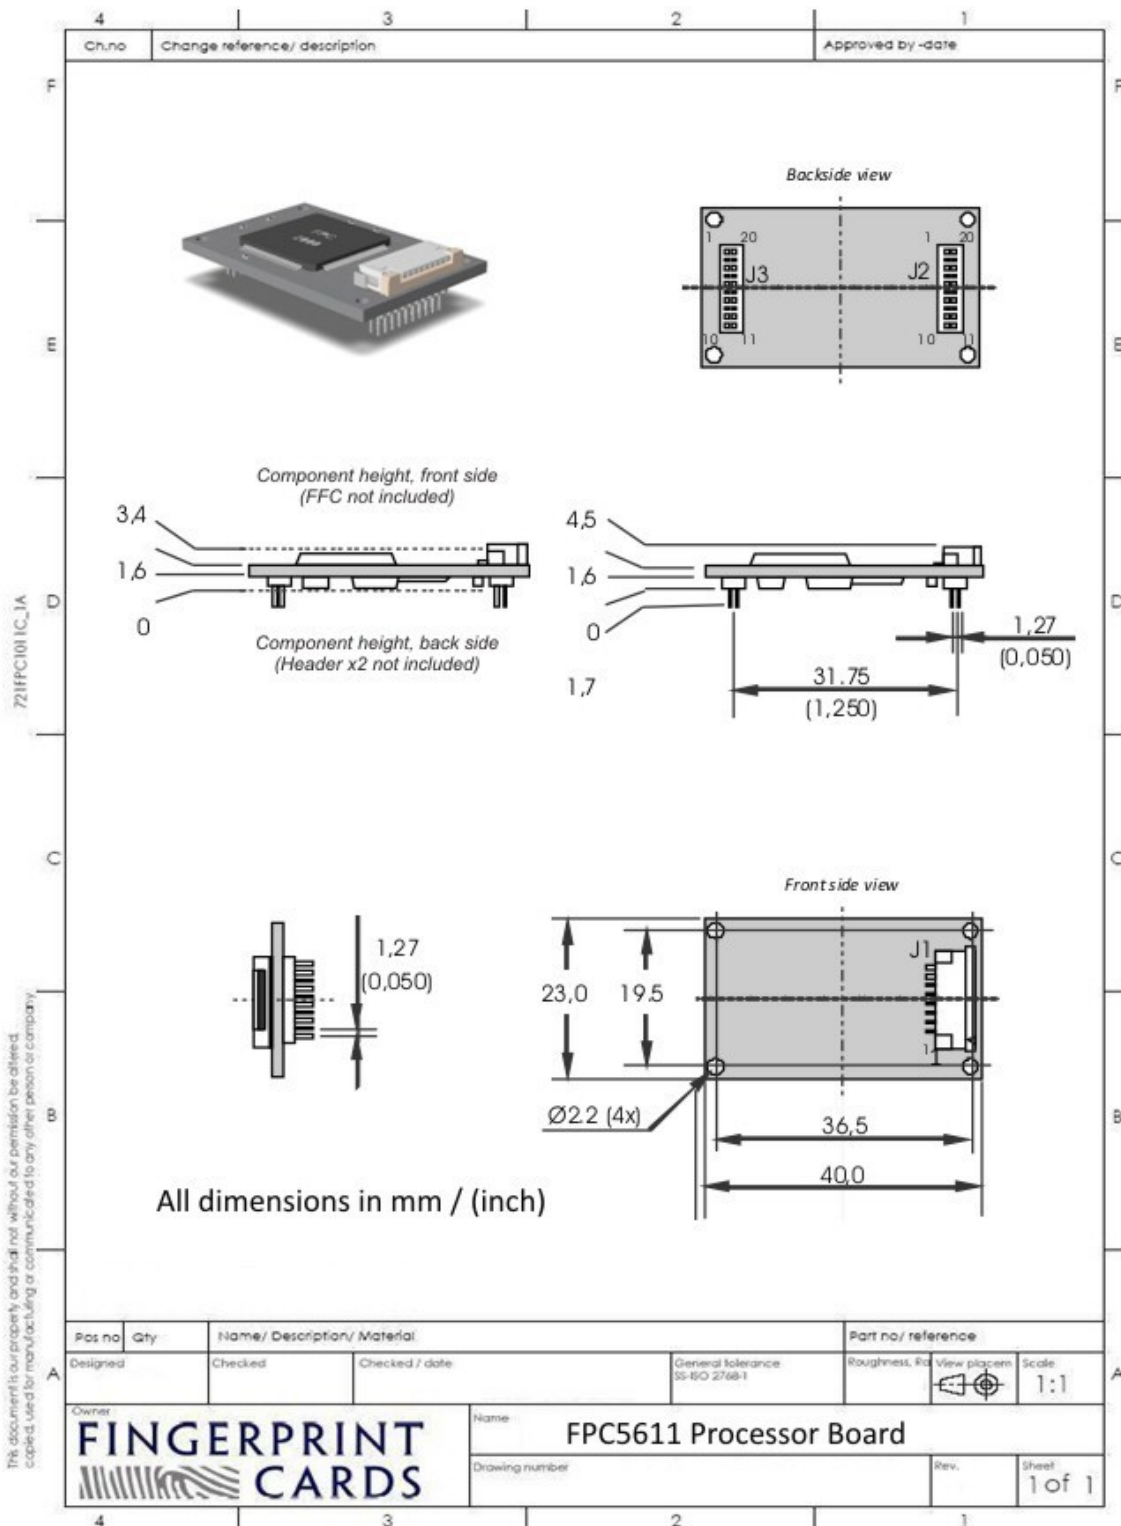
Mechanical drawing FPC5611 Processor board. Drawing is not to scale.
